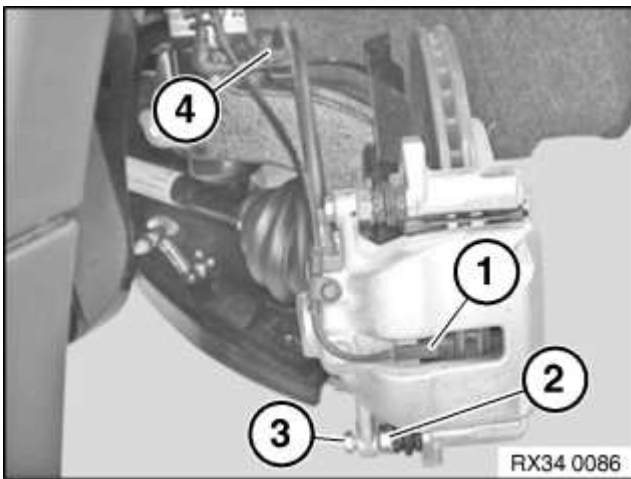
Identifying Brake Pad Sensor, Guide Screw, Hexagon Head, And Brake Hose Holder
